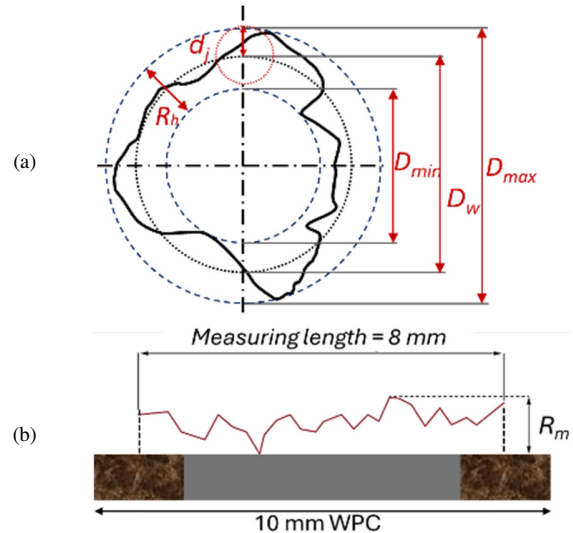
Measurements of: (a) hole roundness and (b) hole surface roughness.
